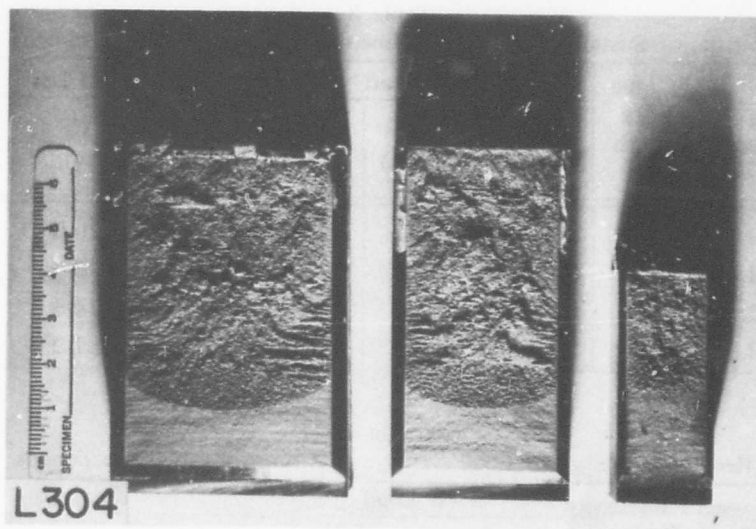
Examples of the fracture surfaces of the three titanium specimen thicknesses (2, 1.5, and 3/4 in., left to right)
